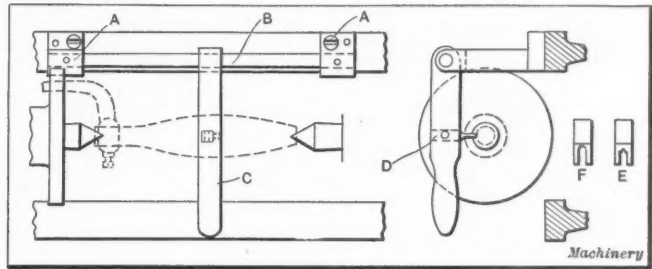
Dividing or Spacing Devices used in winding Irregular-shaped Springs in the Lathe
